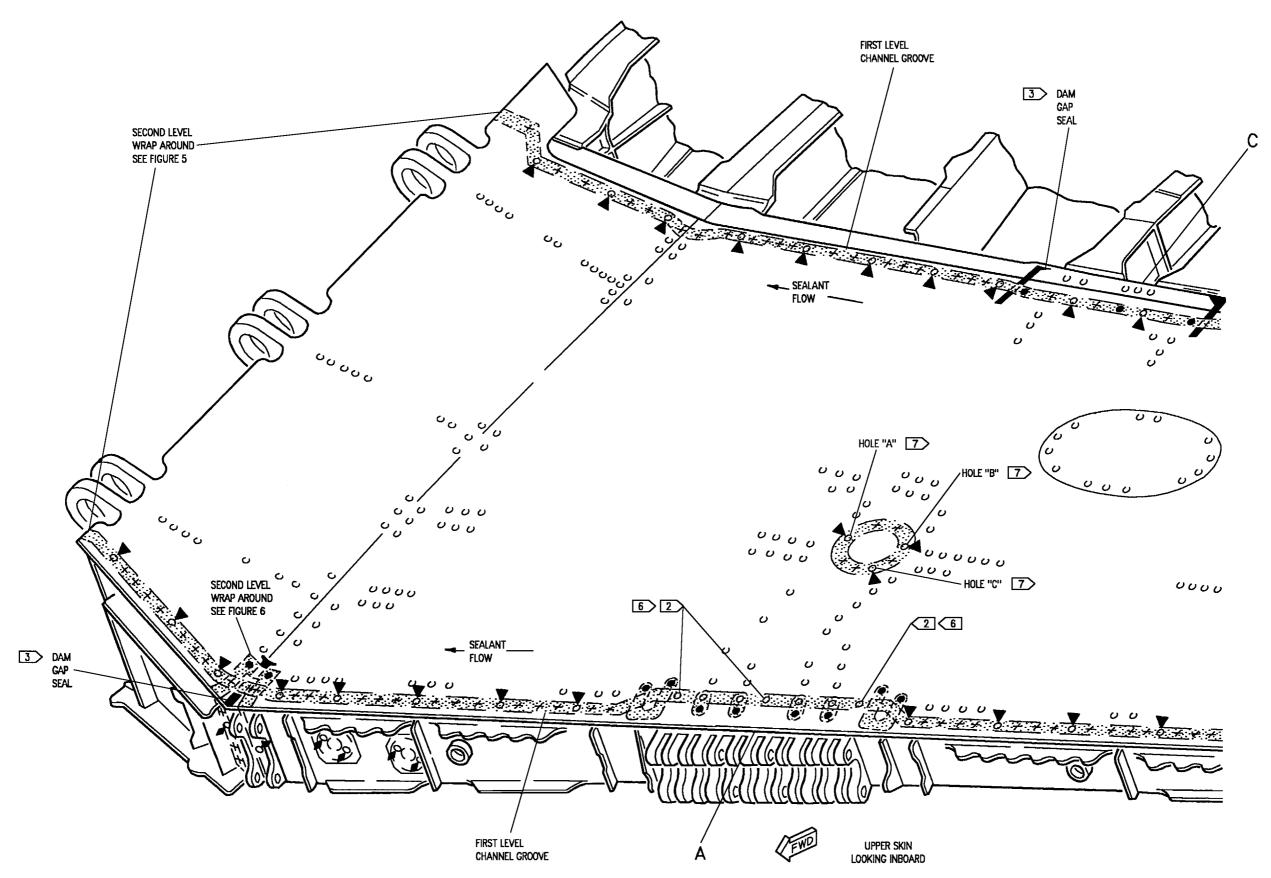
Upper Skin Channel Groove Seal Injection (Sheet 1)
